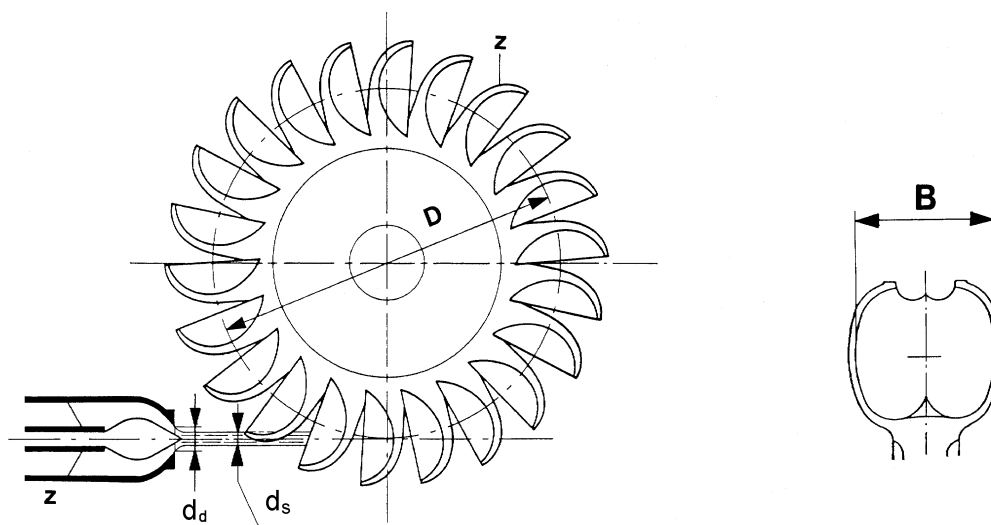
Parameters for design of Pelton Turbine including runner diameter and bucket dimension
